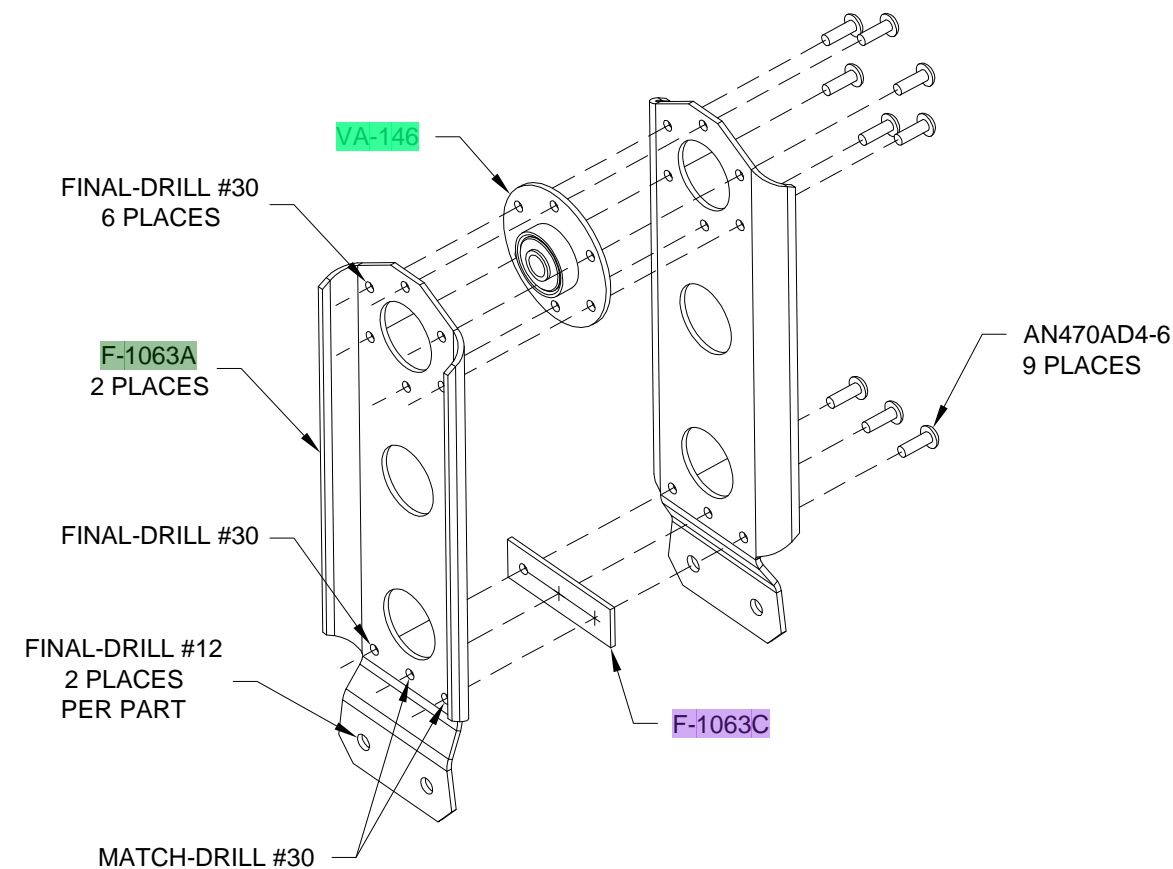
DRILL AND RIVET ELEVATOR IDLER ARM
